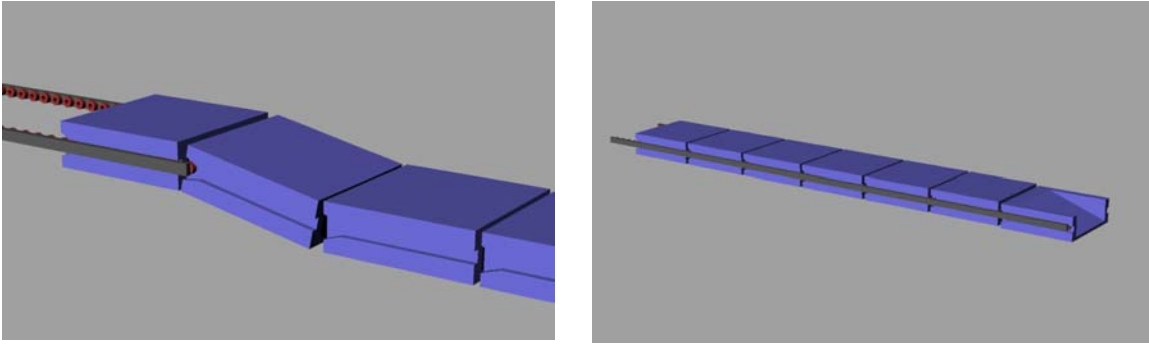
Bow Ramp Track with Rollers (seven of eight sections shown)
